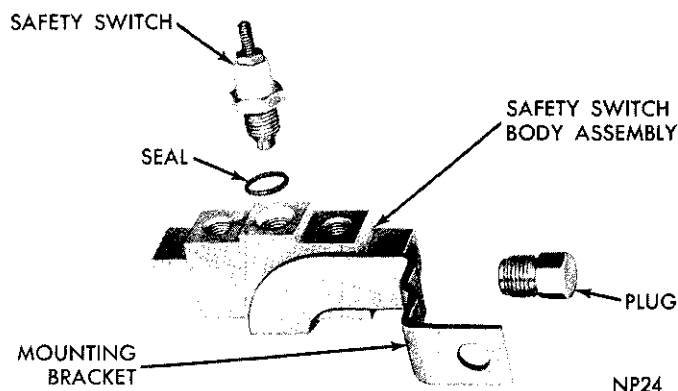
Hydraulic System Safety Switch (Exploded View)
